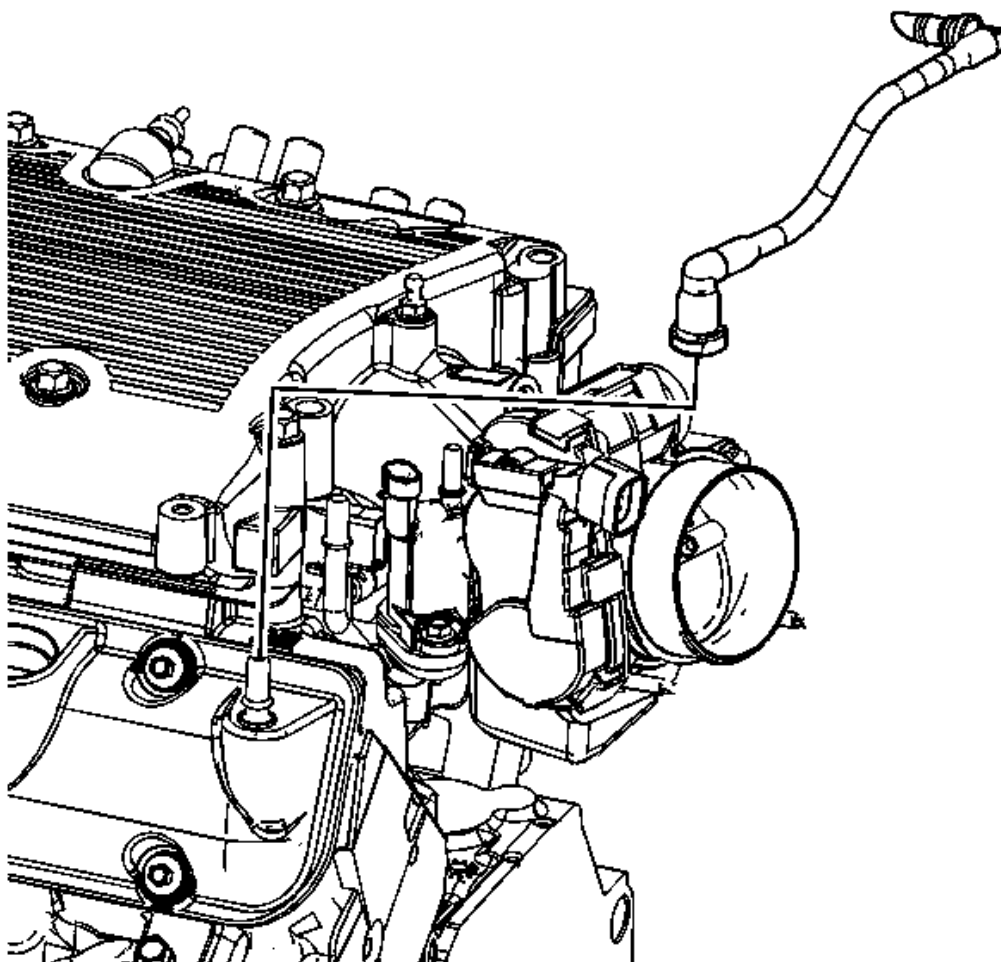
Positive Crankcase Ventilation (PCV) Tube
